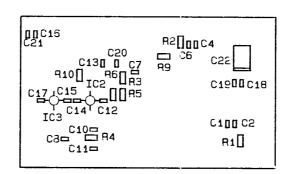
Oscillator Module: 1st L.O. VCO Board Side B Layout
